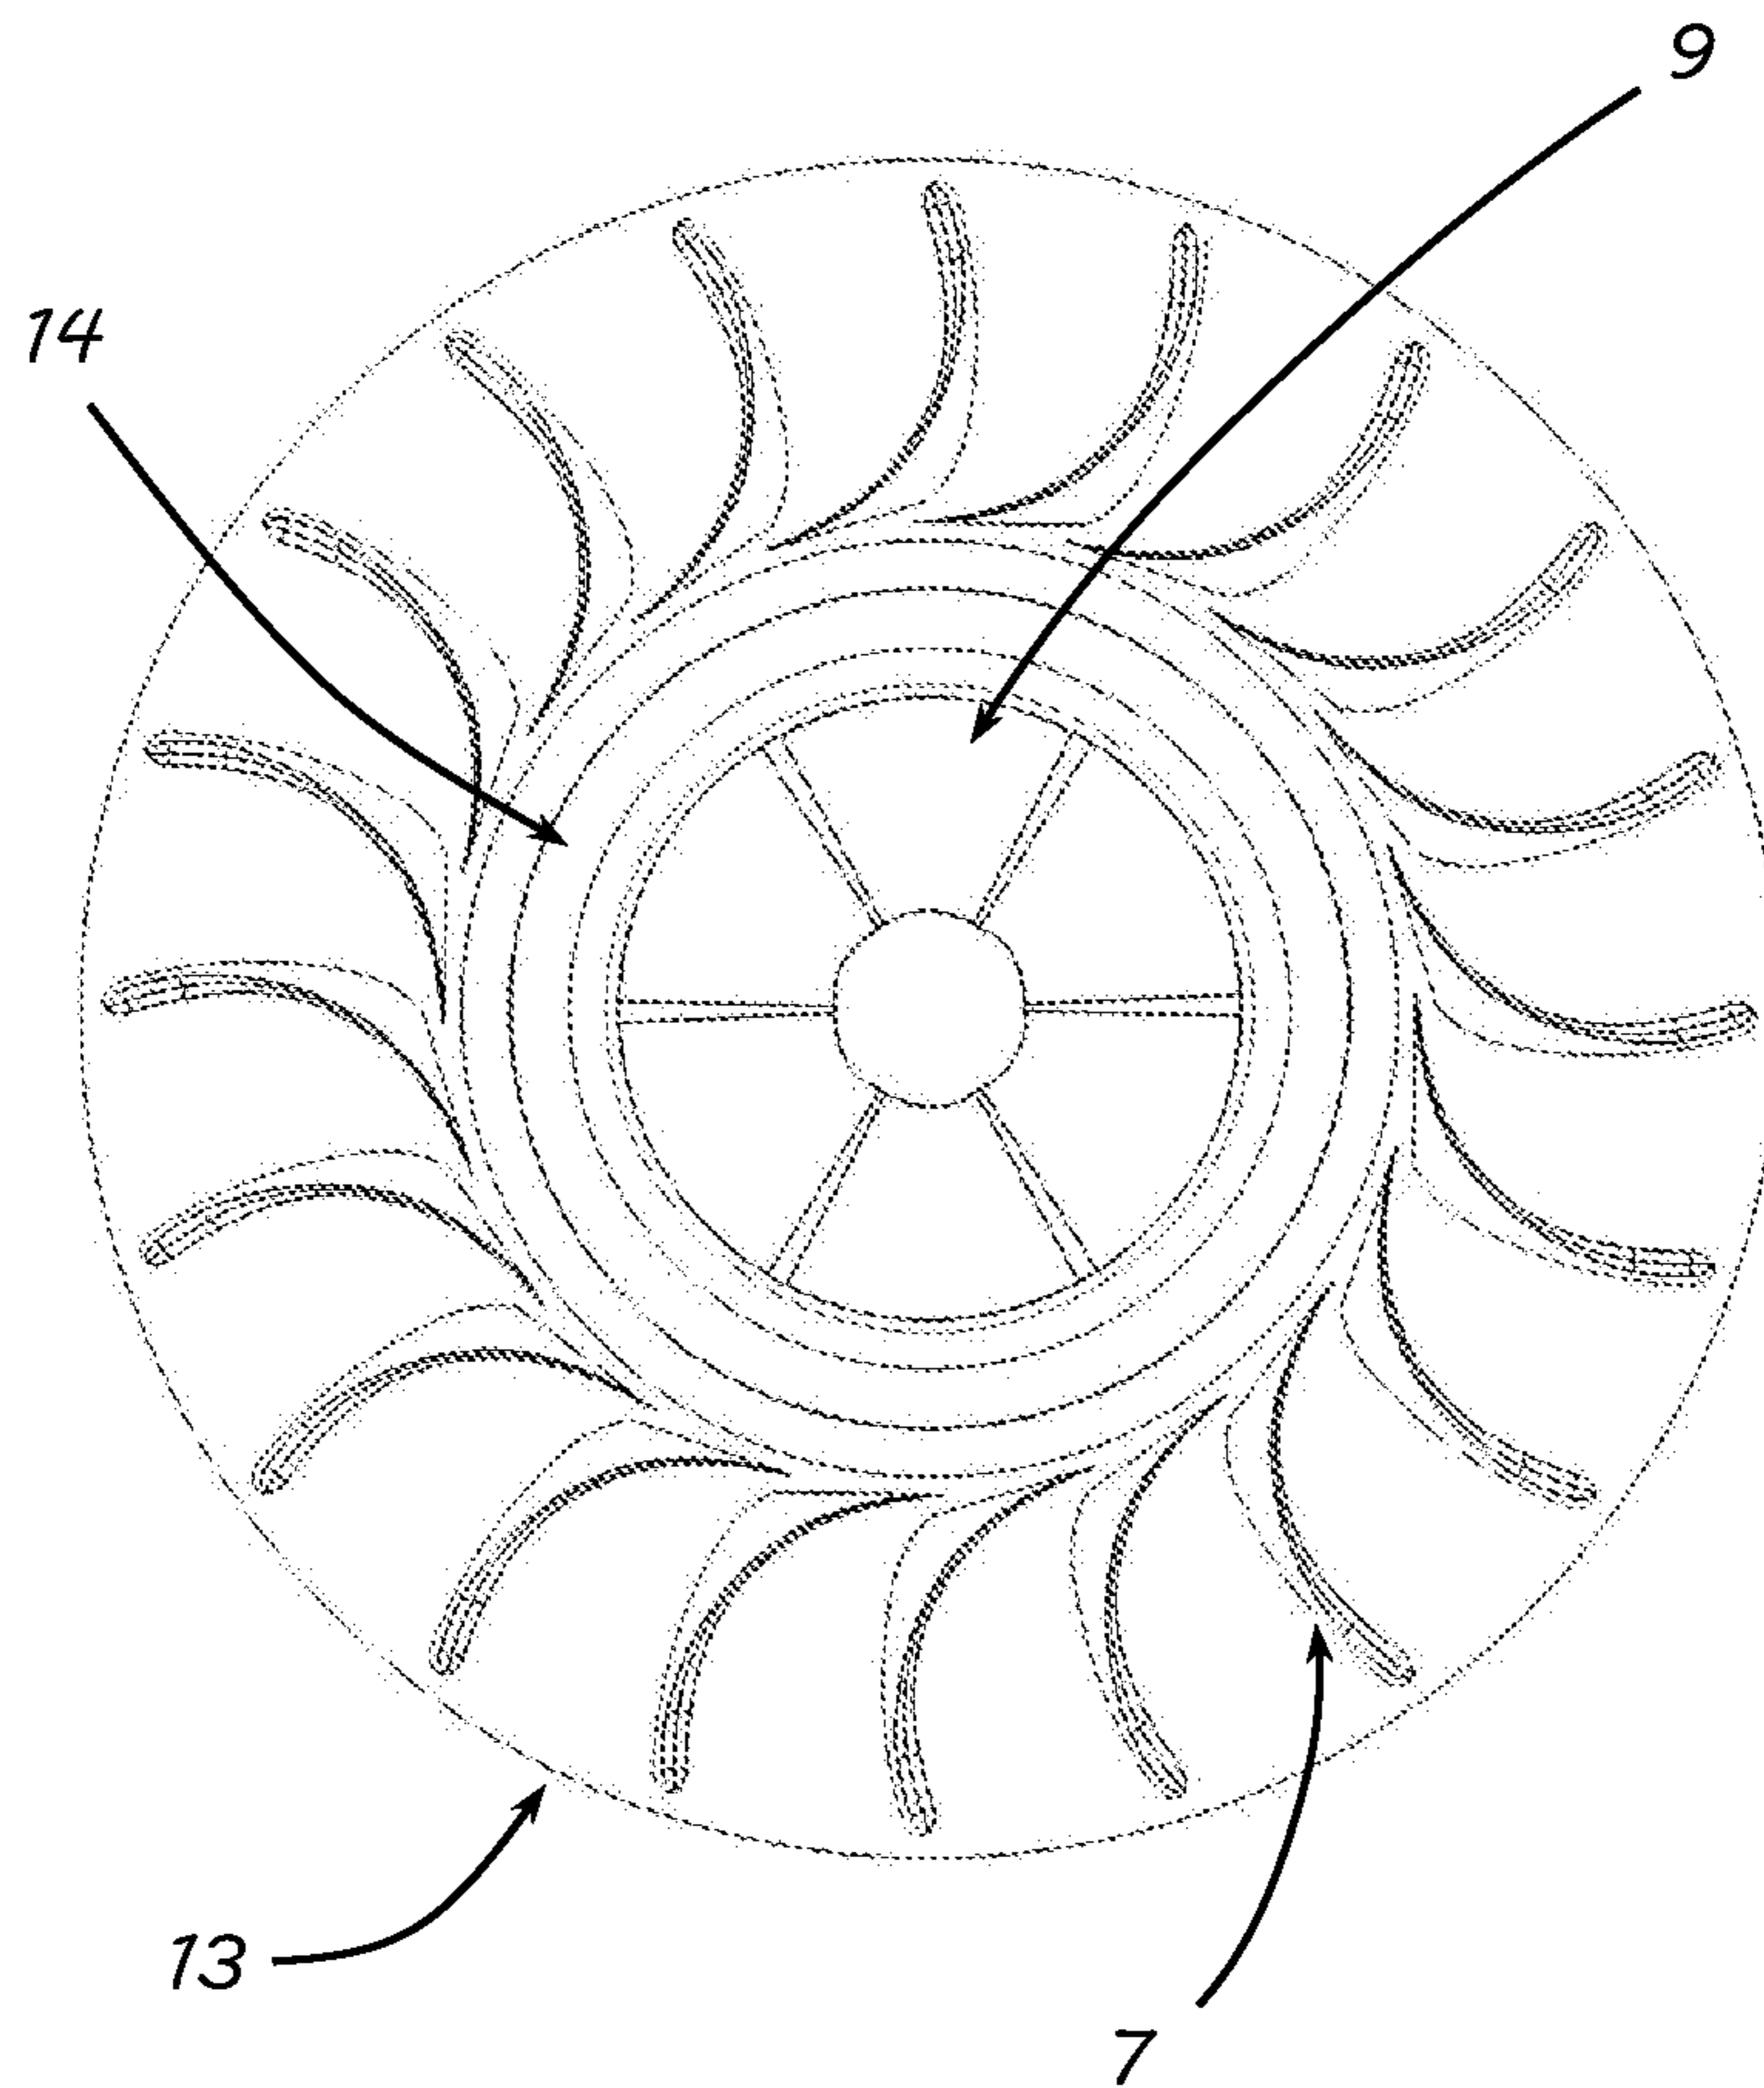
Front View of the Rotor Showing its External and Internal Blades, and Seals Locations
